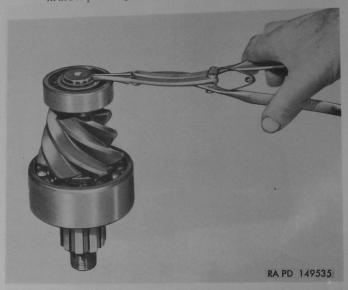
Removal or installation of pinion inner bearing lock with snap ring pliers.
